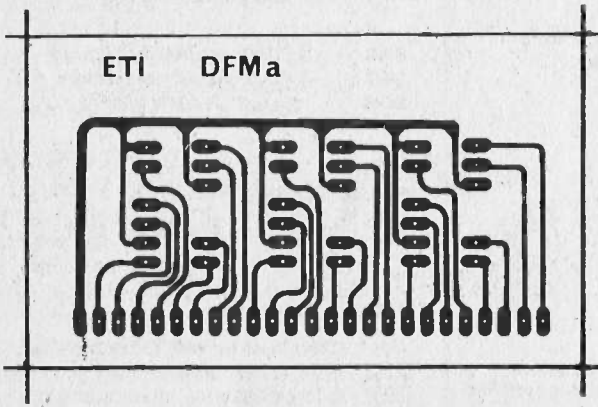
The switching circuit for the DFM. Connections are achieved via the PCB which solders beneath the actual bank
